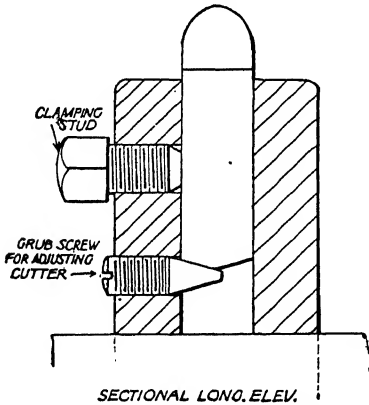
Round-nosed Cutter adjusted and clamped in Boring Head
